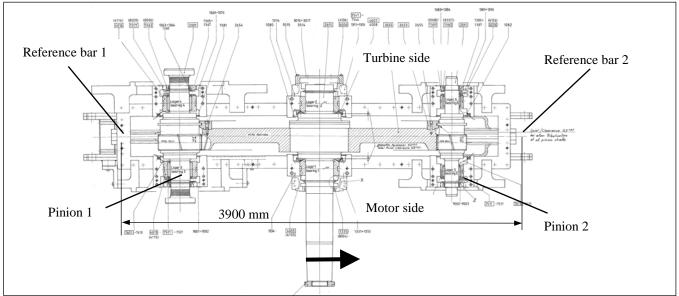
Gear unit Integrally Geared Compressor (Case C). View on the split line
